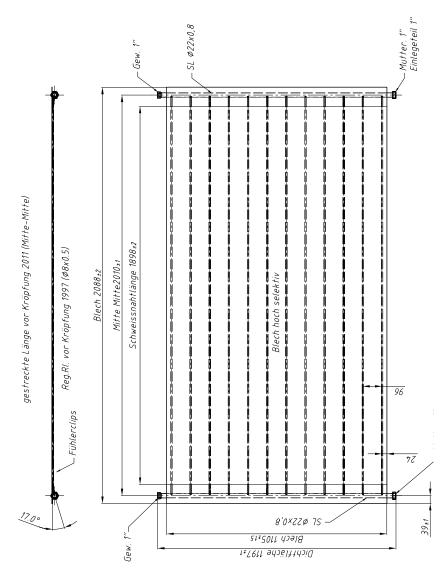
Drawing of absorber layout Collettore Solare Piano CP4XL
